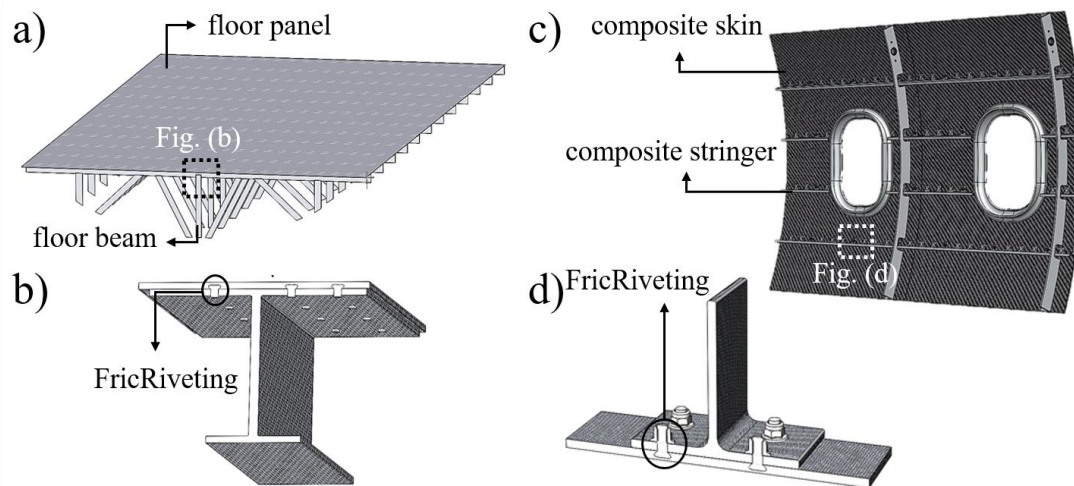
Schematic illustration of potential applications of FricRiveting in aircraft structures: a) composite floor structure, joining floor beam to floor panel, as detailed in (b); and c) composite fuselage, joining stringer to skin, as detailed in (d).
